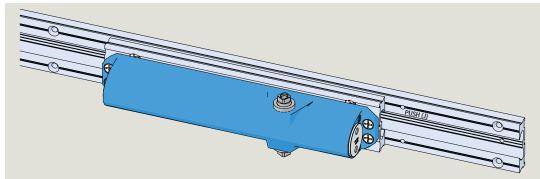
Closer adapter and closer assembled to backplate
